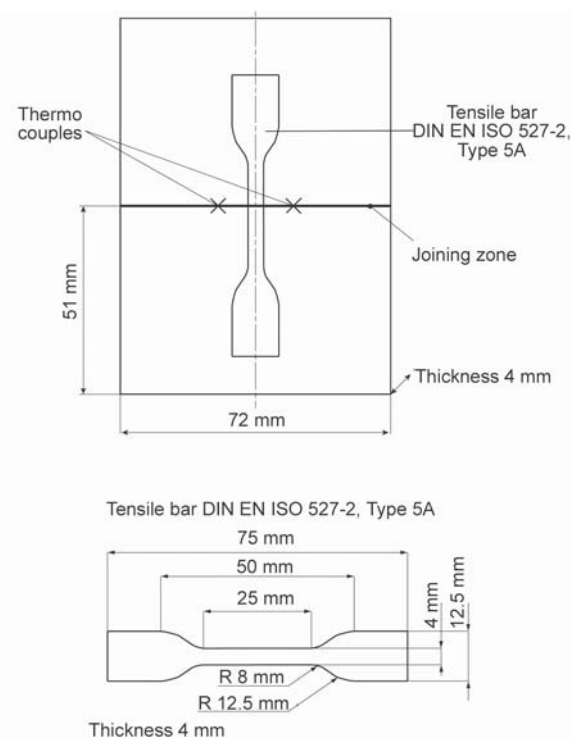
Dimensions of two welded test plates, places of sampling for mechanical investigations and dimensions of tensile bar
